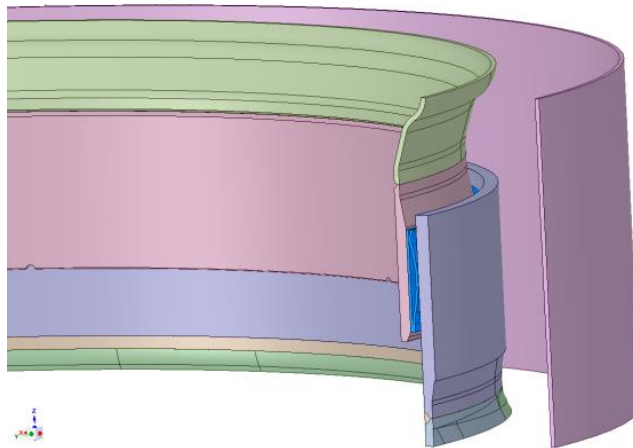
Assembly model of hula seal hot gas casing and combustion inner liner
